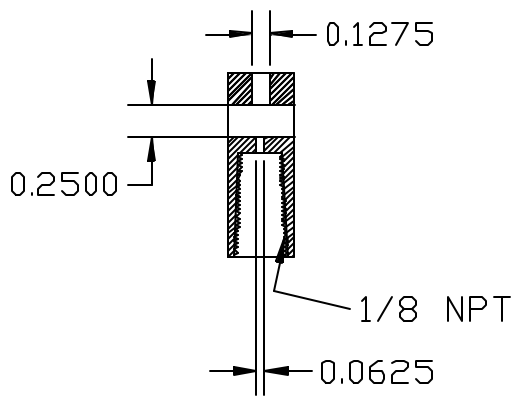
Thermocouple Tap Block Dimensioned in Inches
